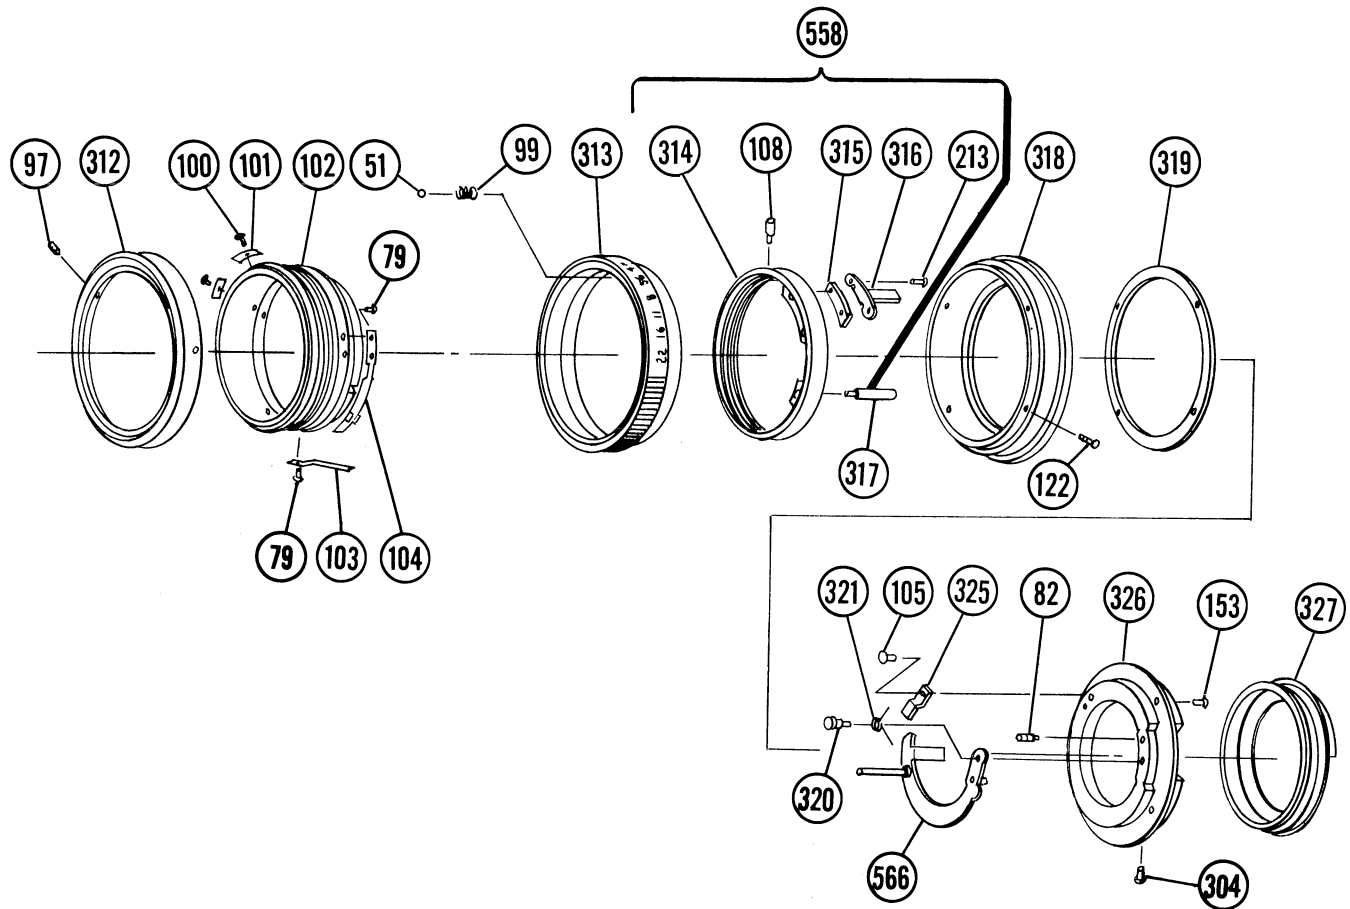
Mount Assembly, Pentax K (Ref. 567, Pg 58)
